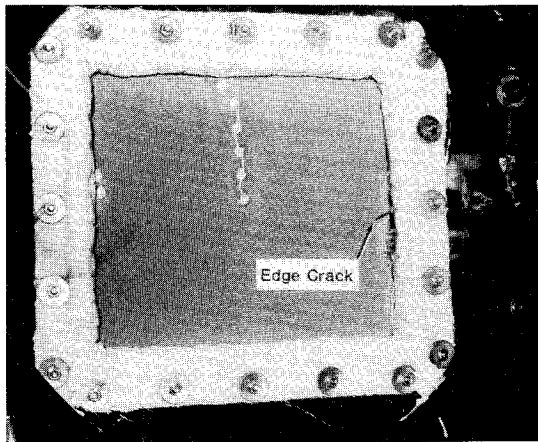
Sonic fatigue failure of flat c-c panel tested at elevated temperature.
